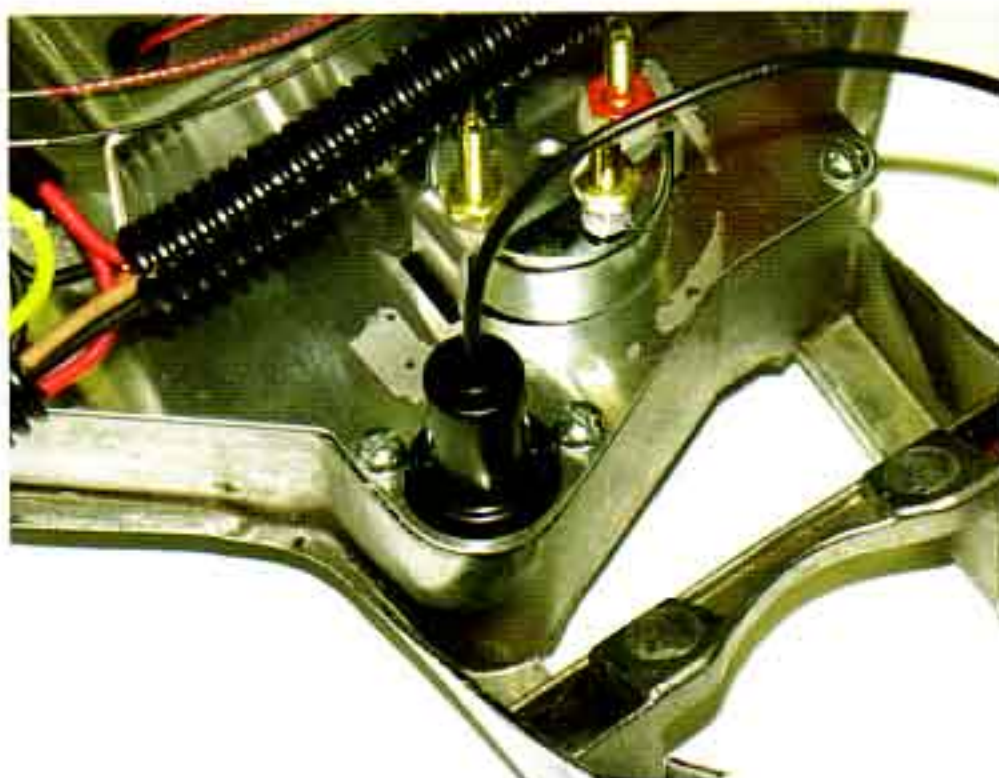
There is a left and right gauge lens retainer. The two retainers are held in place with the two lower indicator mounting screws.
